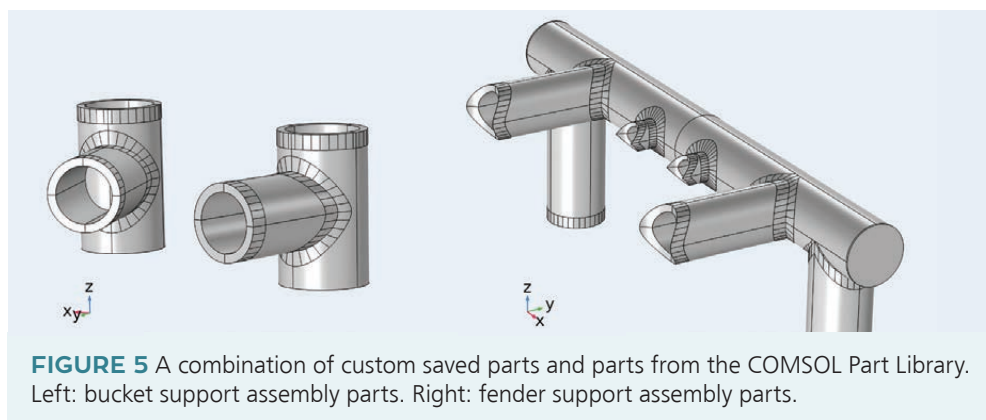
A combination of custom saved parts and parts from the COMSOL Part Library. Left: bucket support assembly parts. Right: fender support assembly parts.
